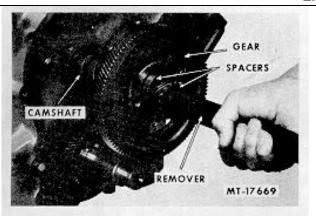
Removing Camshaft Assembly Using SE-1880 Remover
